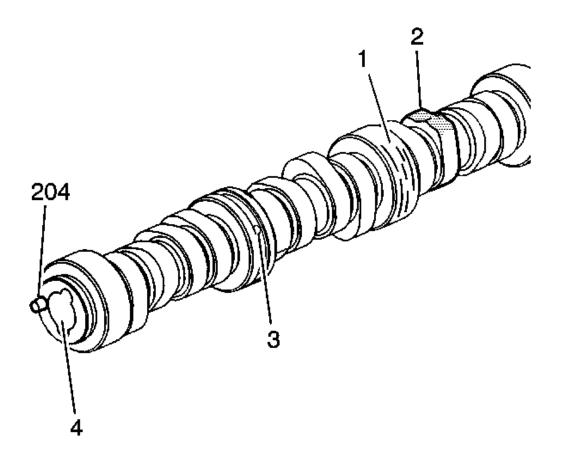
View Of Camshaft Inspection Points Courtesy of GENERAL MOTORS CORP.
